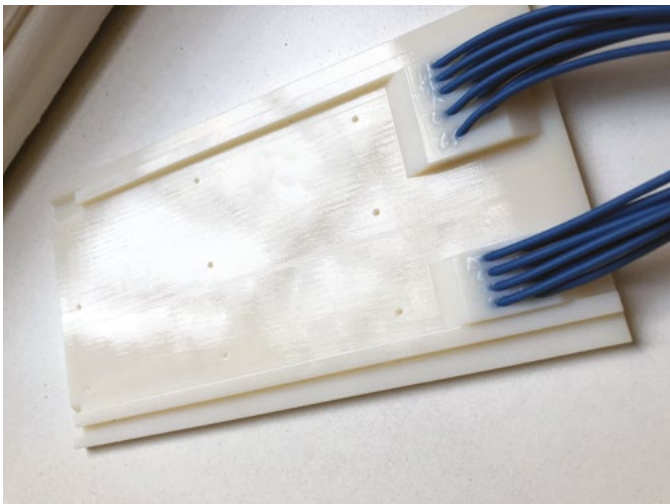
3D-printed instrumented solar panel, fully assembled.
